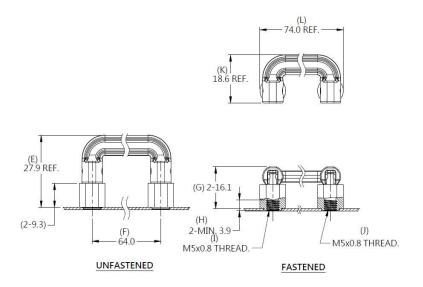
Dimensioned Smart Folding Handle from Reference Design
